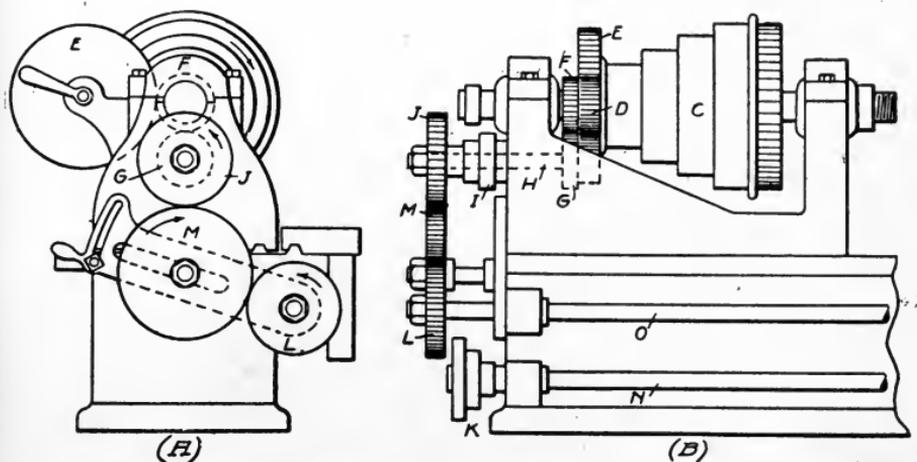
End and Front Elevation of Engine Lathe for Thread Cutting
